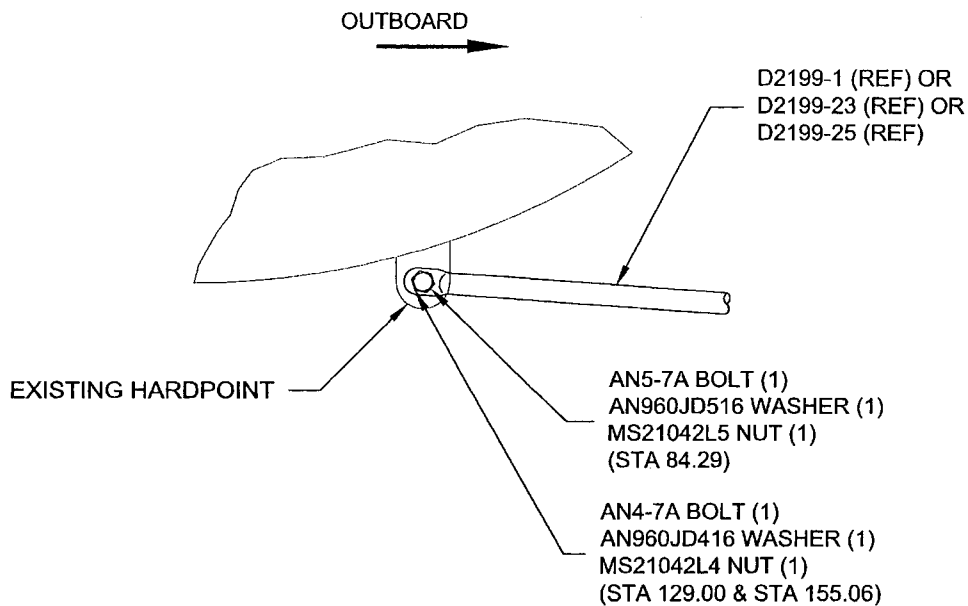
Detail 'F' Strut to Hardpoint Attachment
